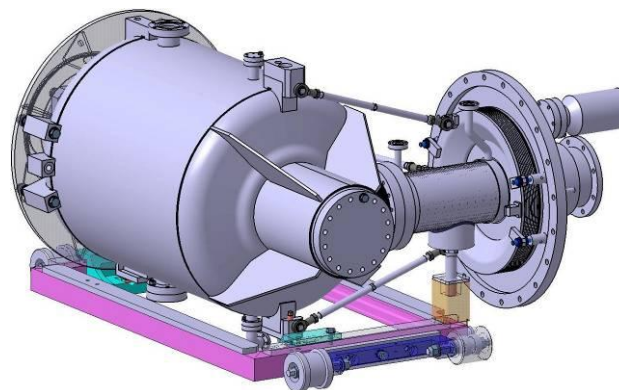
complete cavity equipped with the helium vessel and vacuum part of the FPC.
